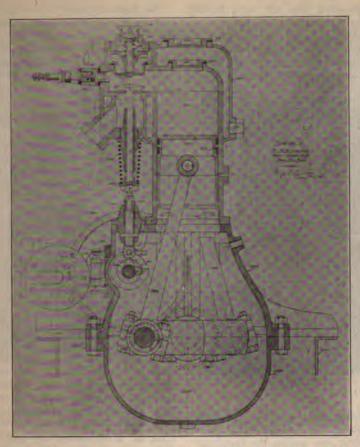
Section Through Cylinder and Valve Chamber of Motor.
